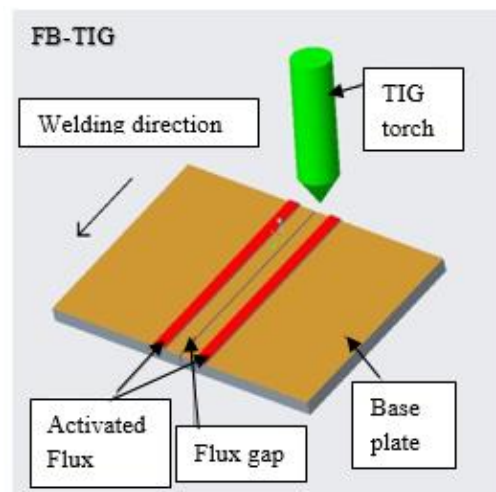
A schematic diagram of FB-TIG welding
